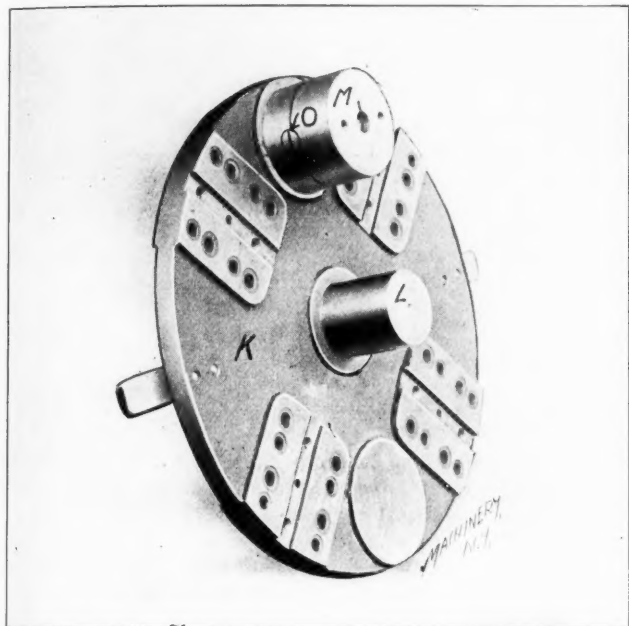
Bushing Plate for the Drilling Operation shown in Fig. 12.
